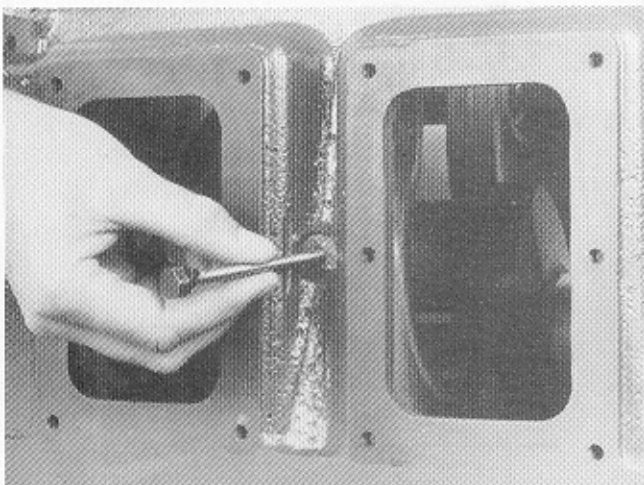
Removing the Intermediate Bearing Housing Locking Screw (PH2)
